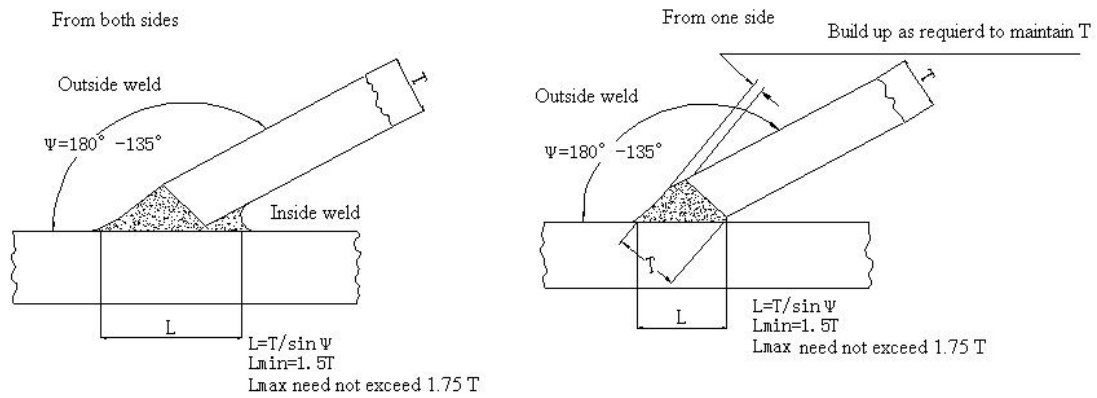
(2) Weld Location 1
